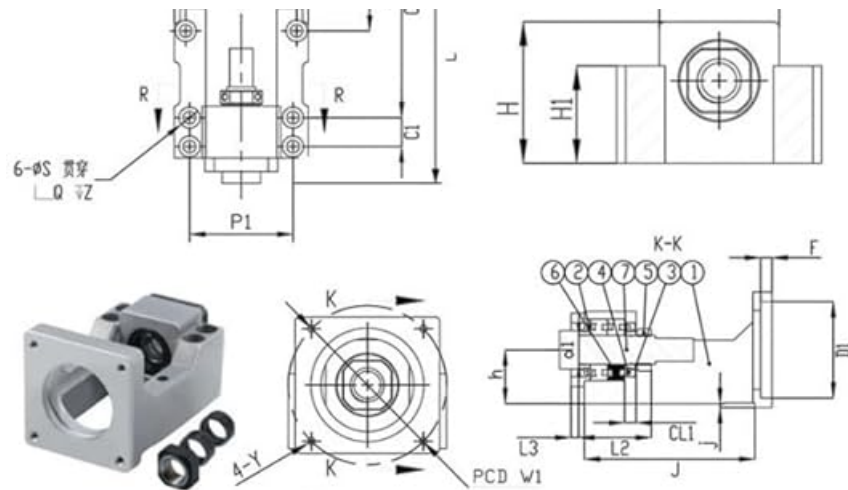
Technical diagram for HM12-57 and HM12-60 series mounts, including dimensions and assembly details.
